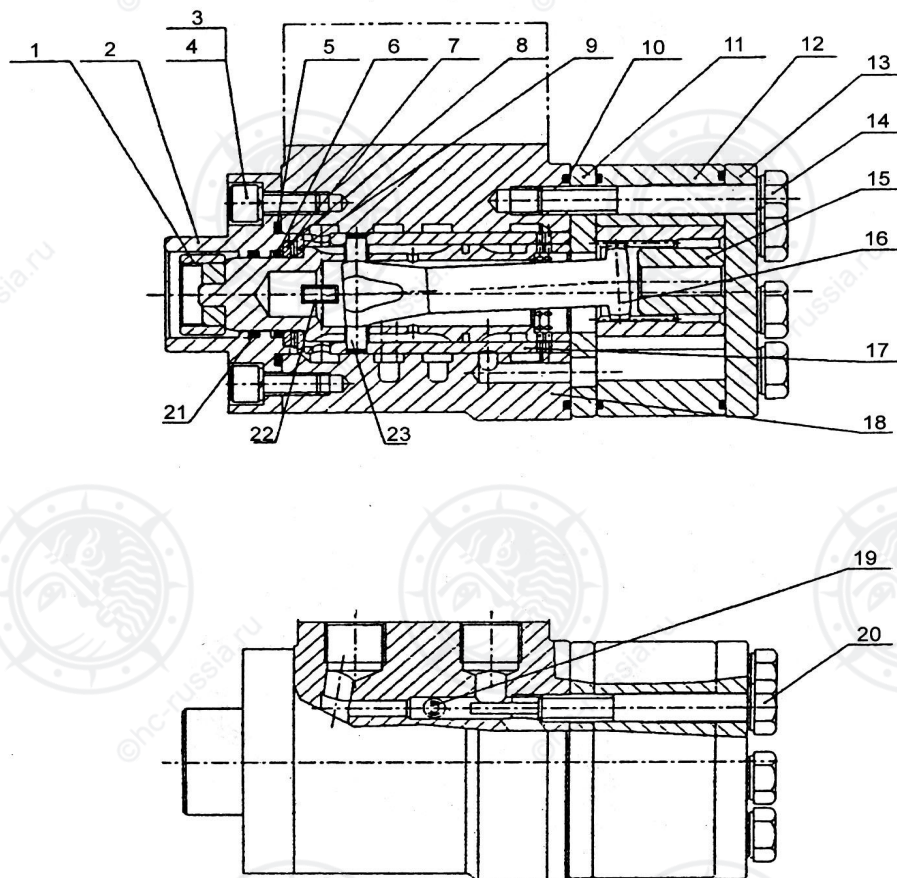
cycloidal rotor full hydrostatic power steering gear
